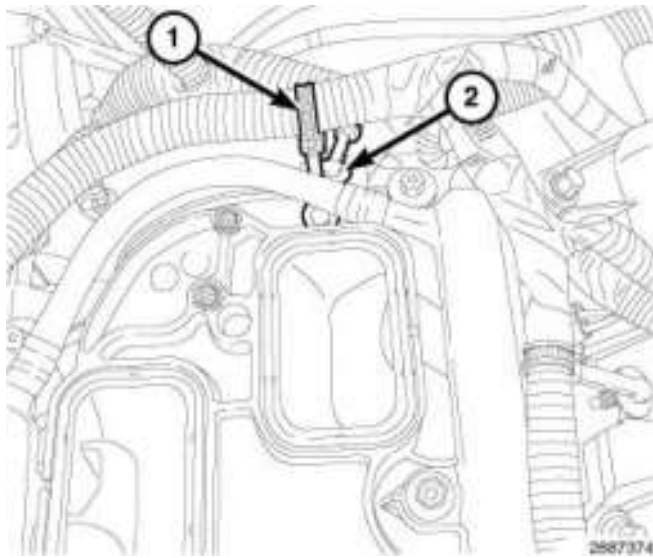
Injection/Ignition Harness Retainer & Main Wire Harness Retainer
